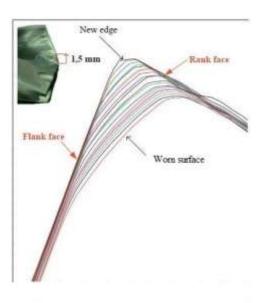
Wear of the cutter tip on the flank surface depending on the number of drilled holes [3].
